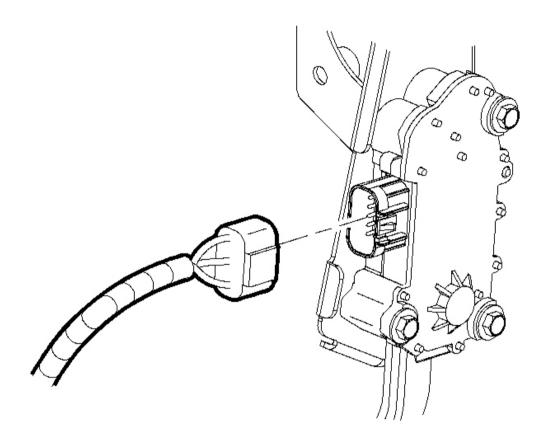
Disconnecting/Connecting Accelerator Pedal Assembly Electrical Connector Courtesy of GENERAL MOTORS CORP.
